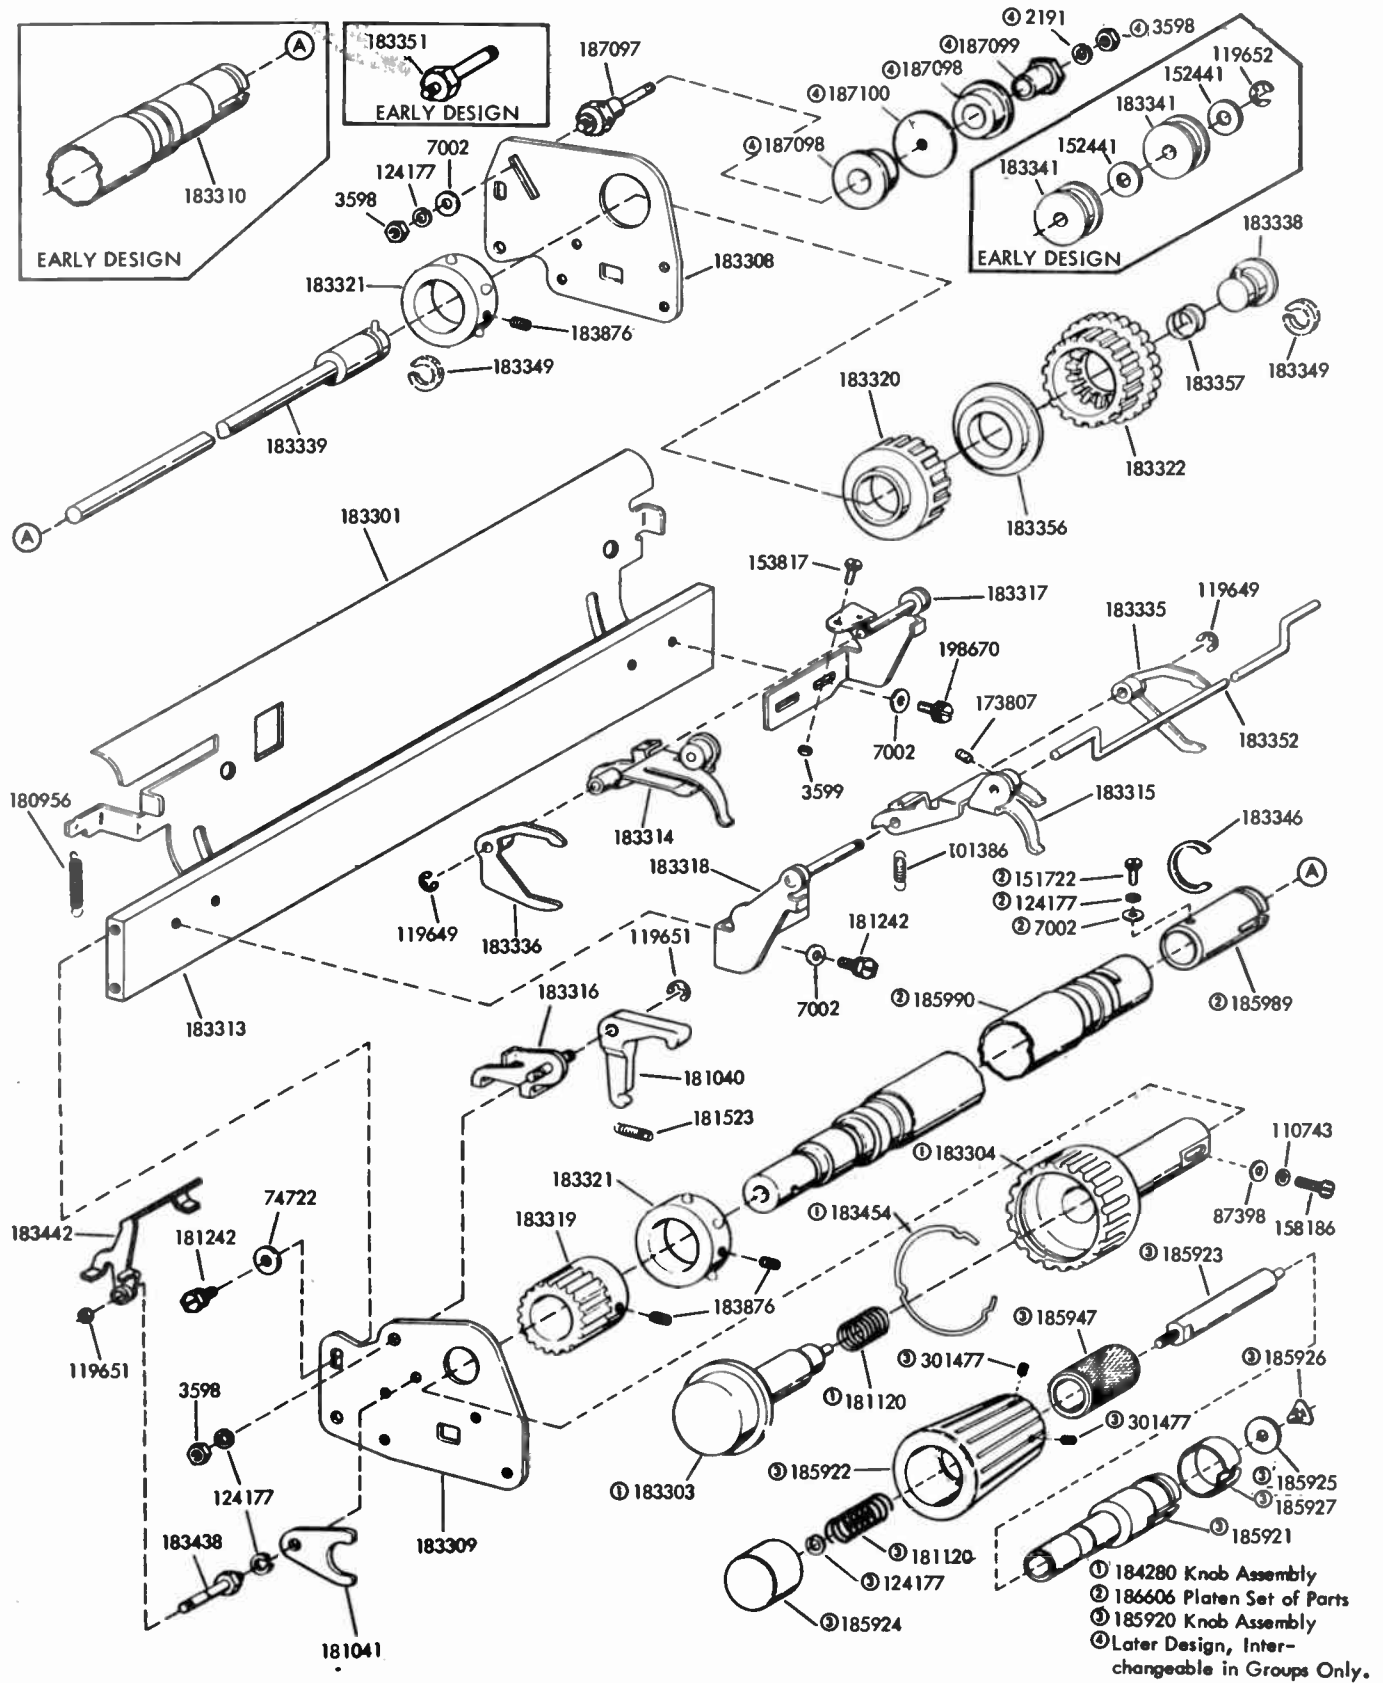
PLATEN MECHANISM - SPROCKET FEED
